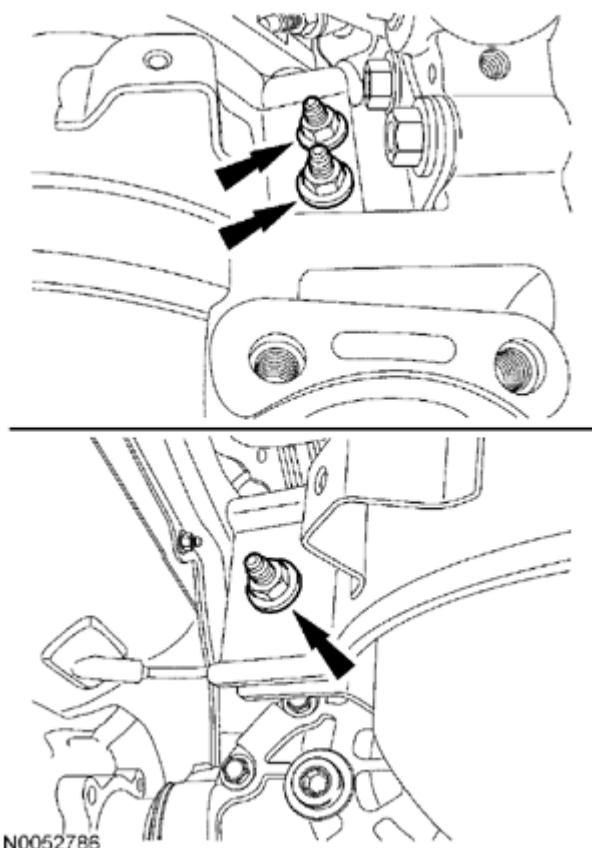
Locating Nuts And RH Exhaust Heat Shield Bracket (Outboard Half)
